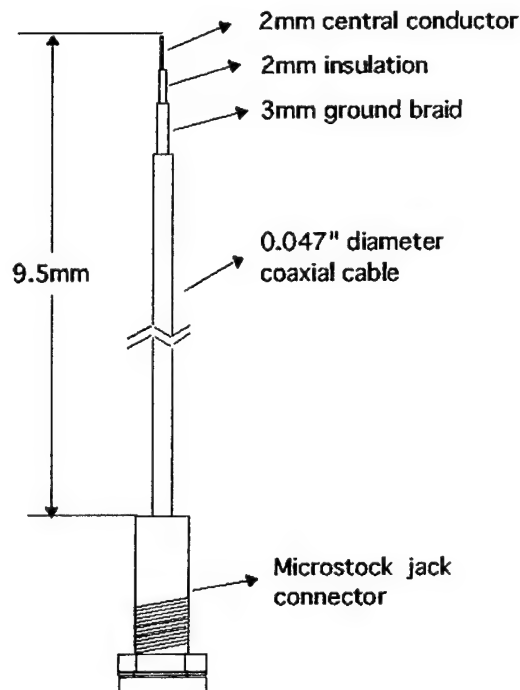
Suhner connector and cable (from Microstock) used in the diamond detector assembly.
